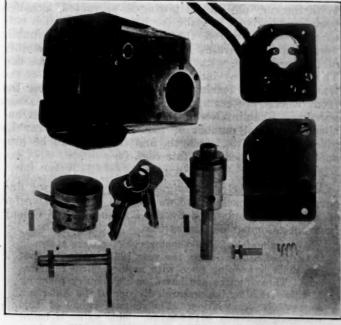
Parts of the Lock Illustrated in Fig. 32 The View Shows the Lock-Housing and the Unit Assemblies
